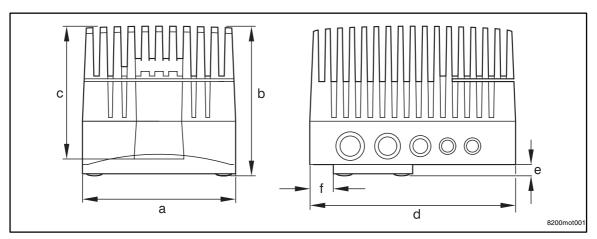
Dimensions 0.25 ... 2.2 kW
